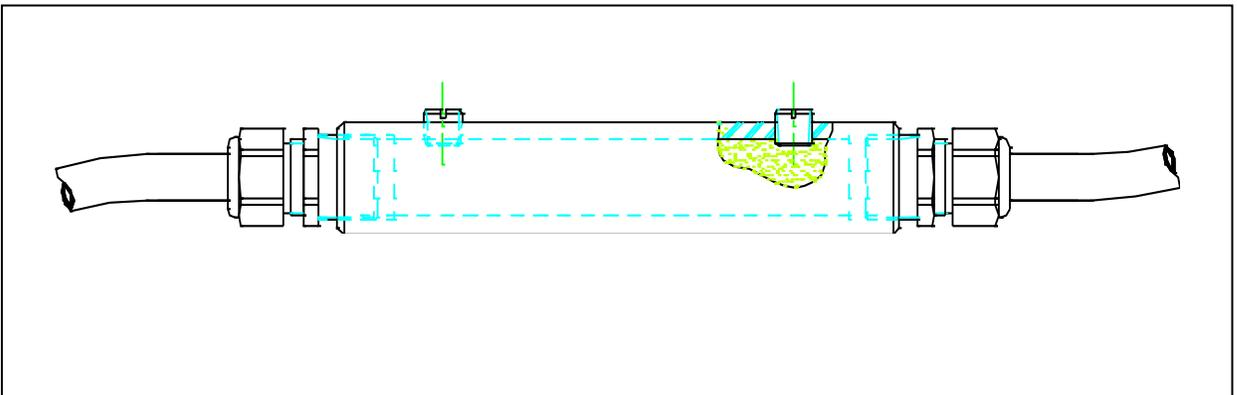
Cable splicing assembly with IRC-390 cable with vented plug (FR-1135050900E)
